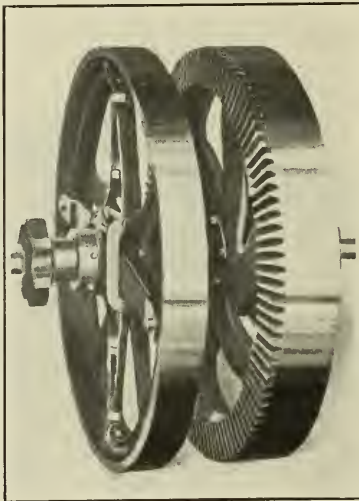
Main Drive Gear and Friction Wheel of 75-horsepower Tractor
